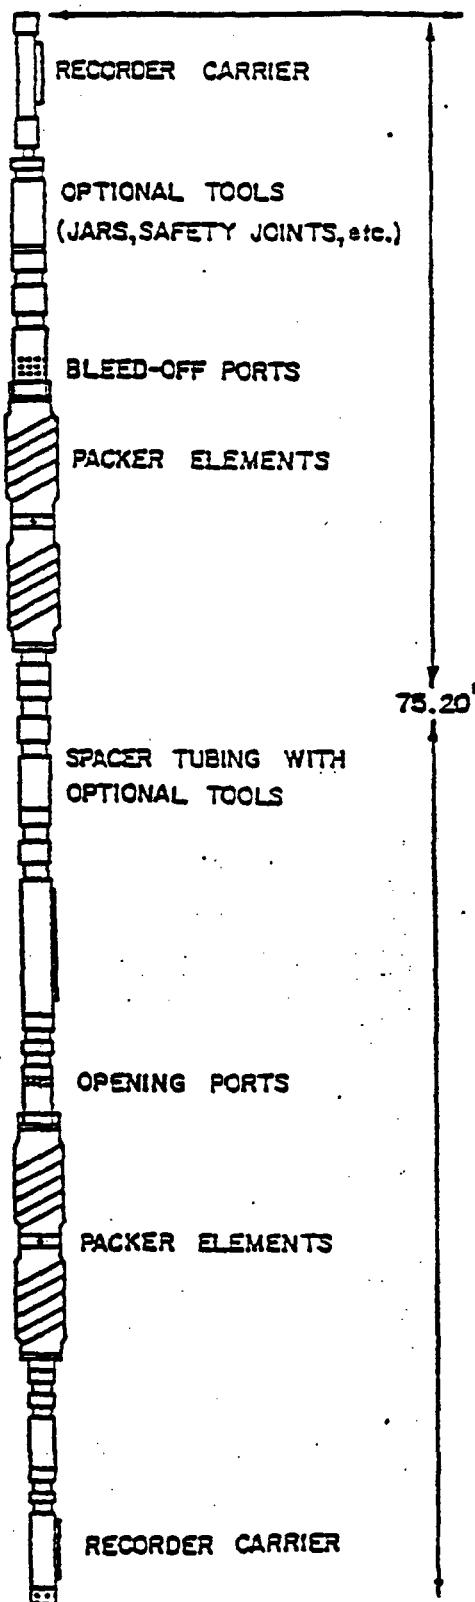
Inflatable straddle packer tool for conventional drill-stem tests. (Courtesy Lykes, Inc., Houston, Texas)
